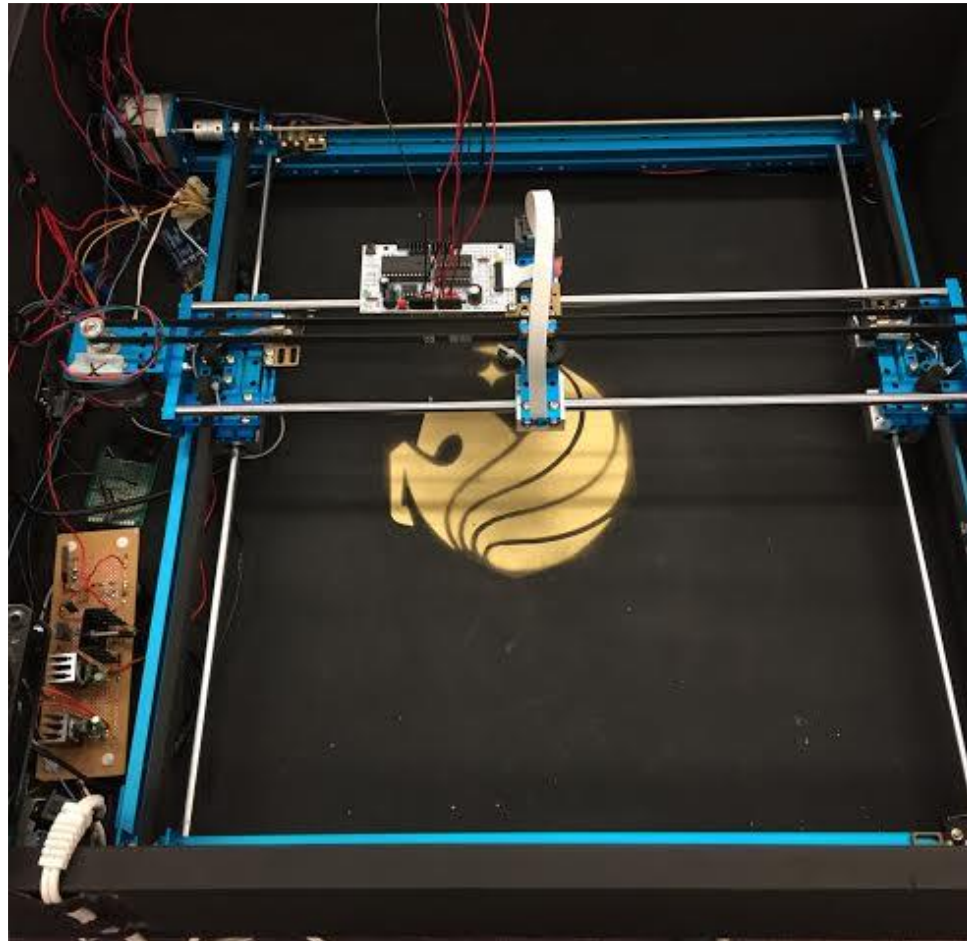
Universal Circuit Fabricator Frame and Final Design
